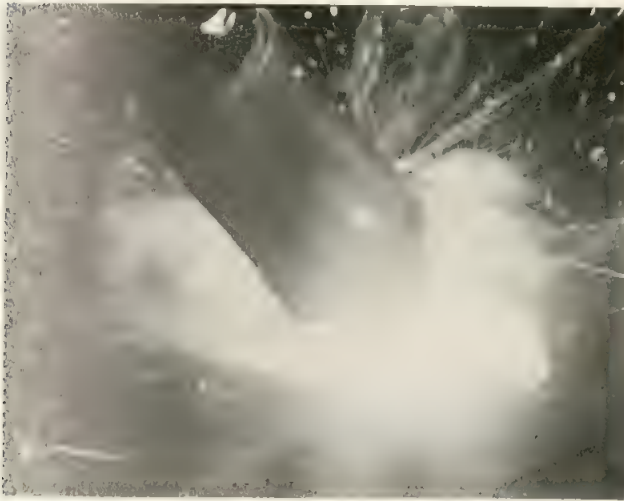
Welder's view of flux-cored arc using CO₂ shielding gas.
